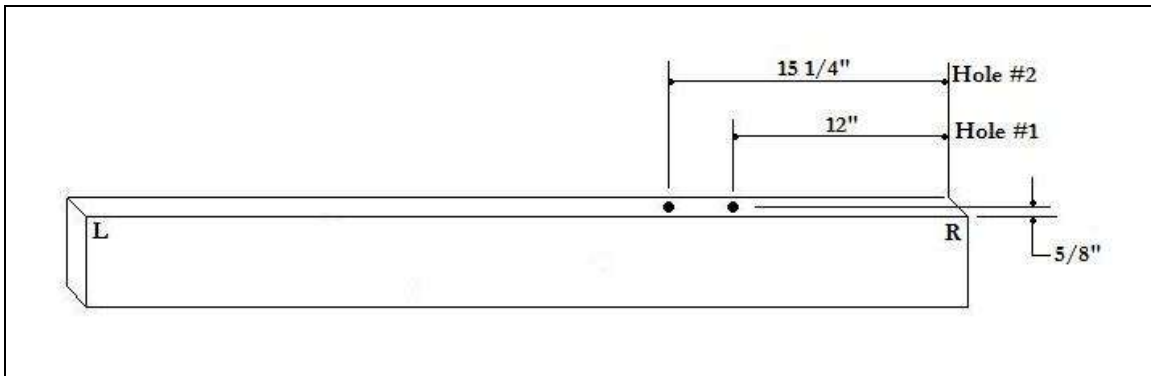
Front Treadle Pulley Support Crossmember Holes
